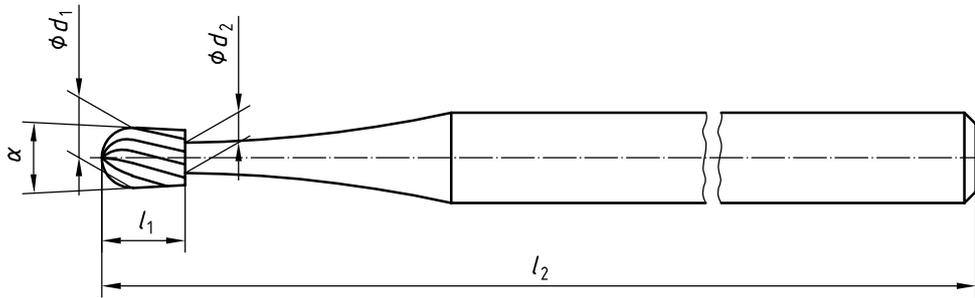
Conical, rounded edge, head length above 7,5 mm, carbide finishing burs
